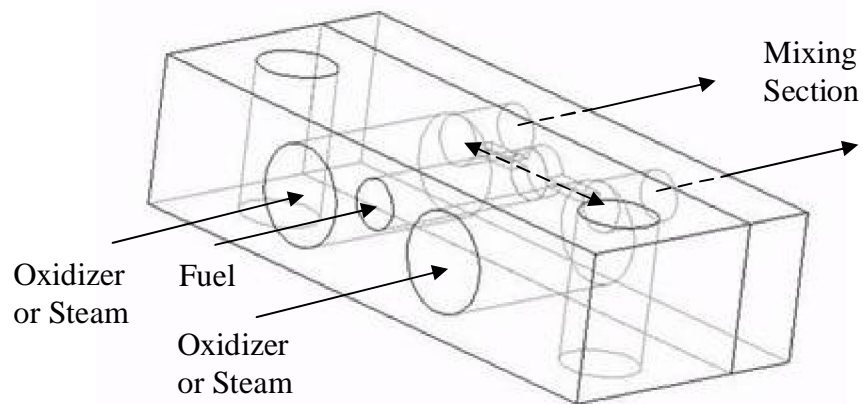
Hidden view drawing of inlet manifold showing how the fuel and oxidizer are mixed on the combustion side
